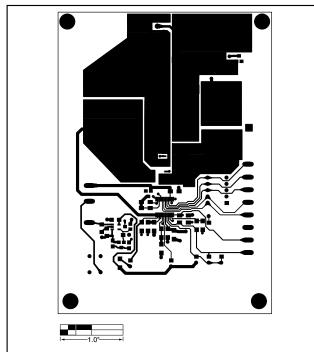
MAX1711 Voltage Positioning EV Kit PC Board Layout—Component Side
